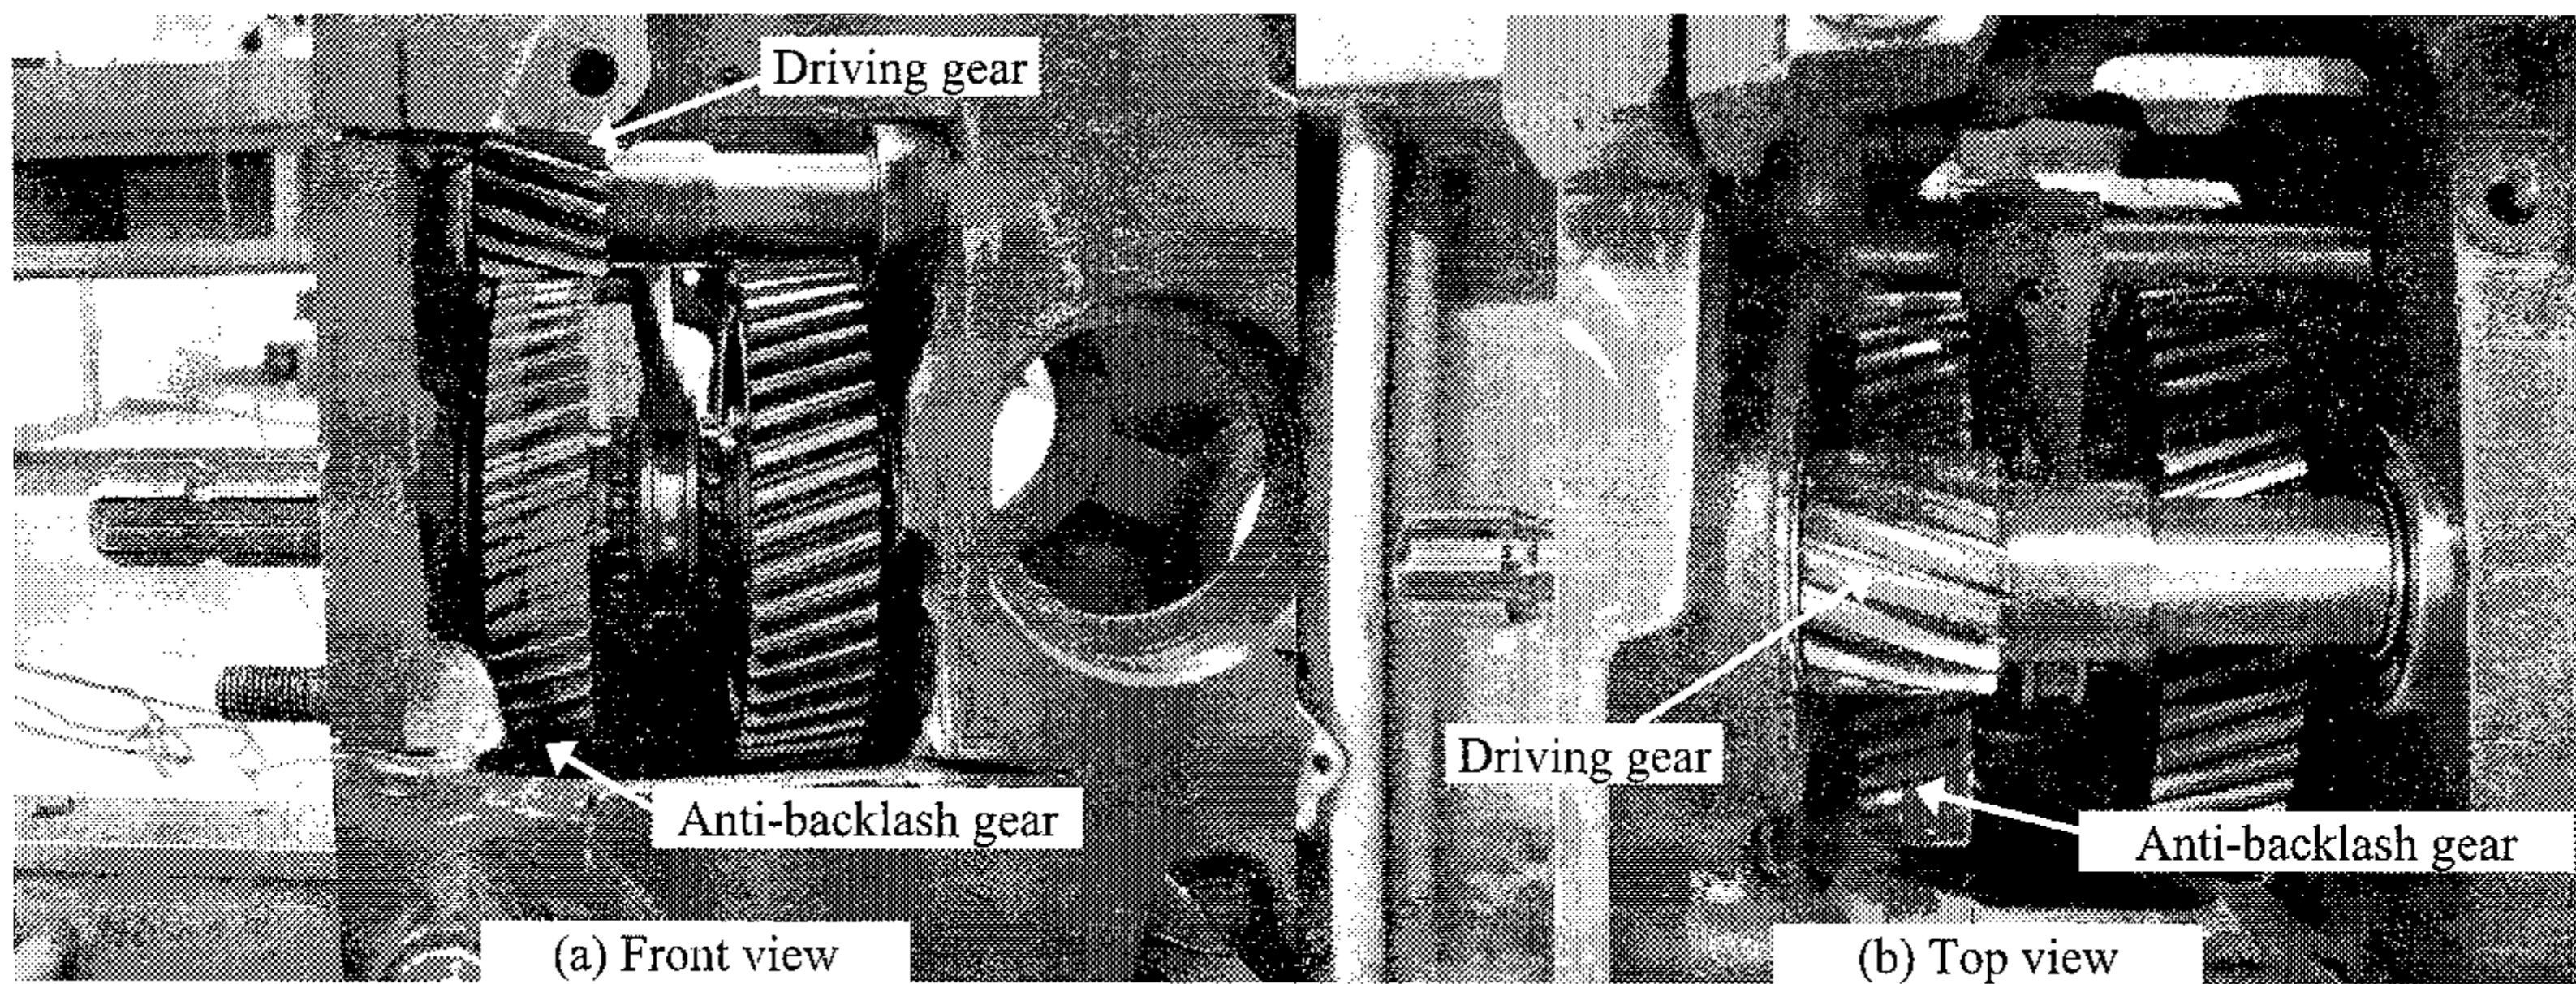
A close view of anti-backlash gear installed on PTO gearbox.
